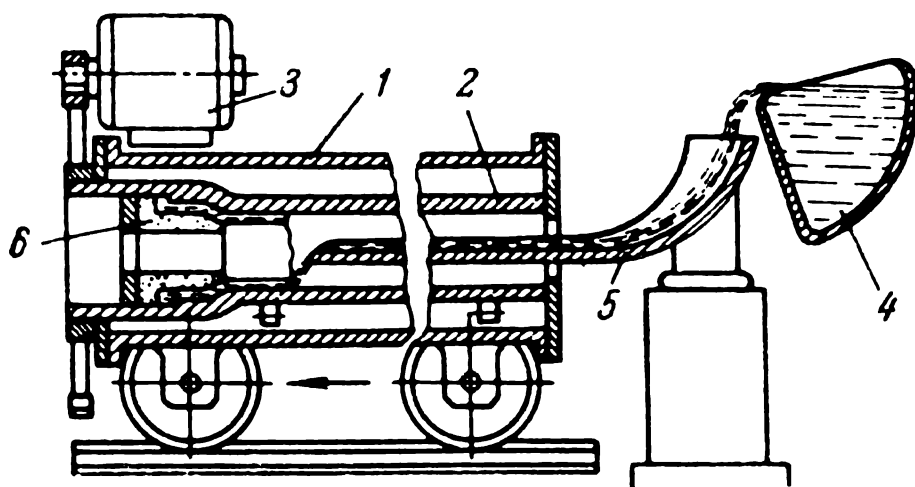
Schematic diagram of a centrifugal pipe-casting machine:
